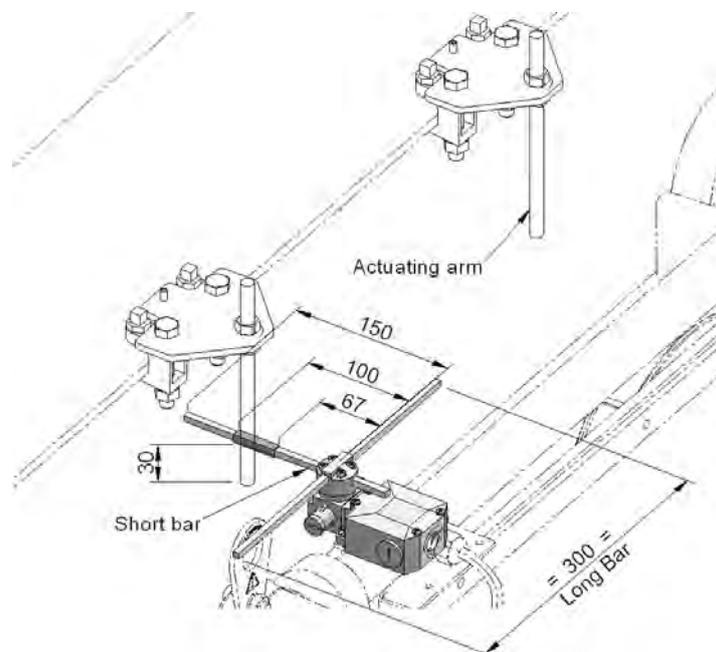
Setting the Traverse Limit - Single Girder Arrangement
